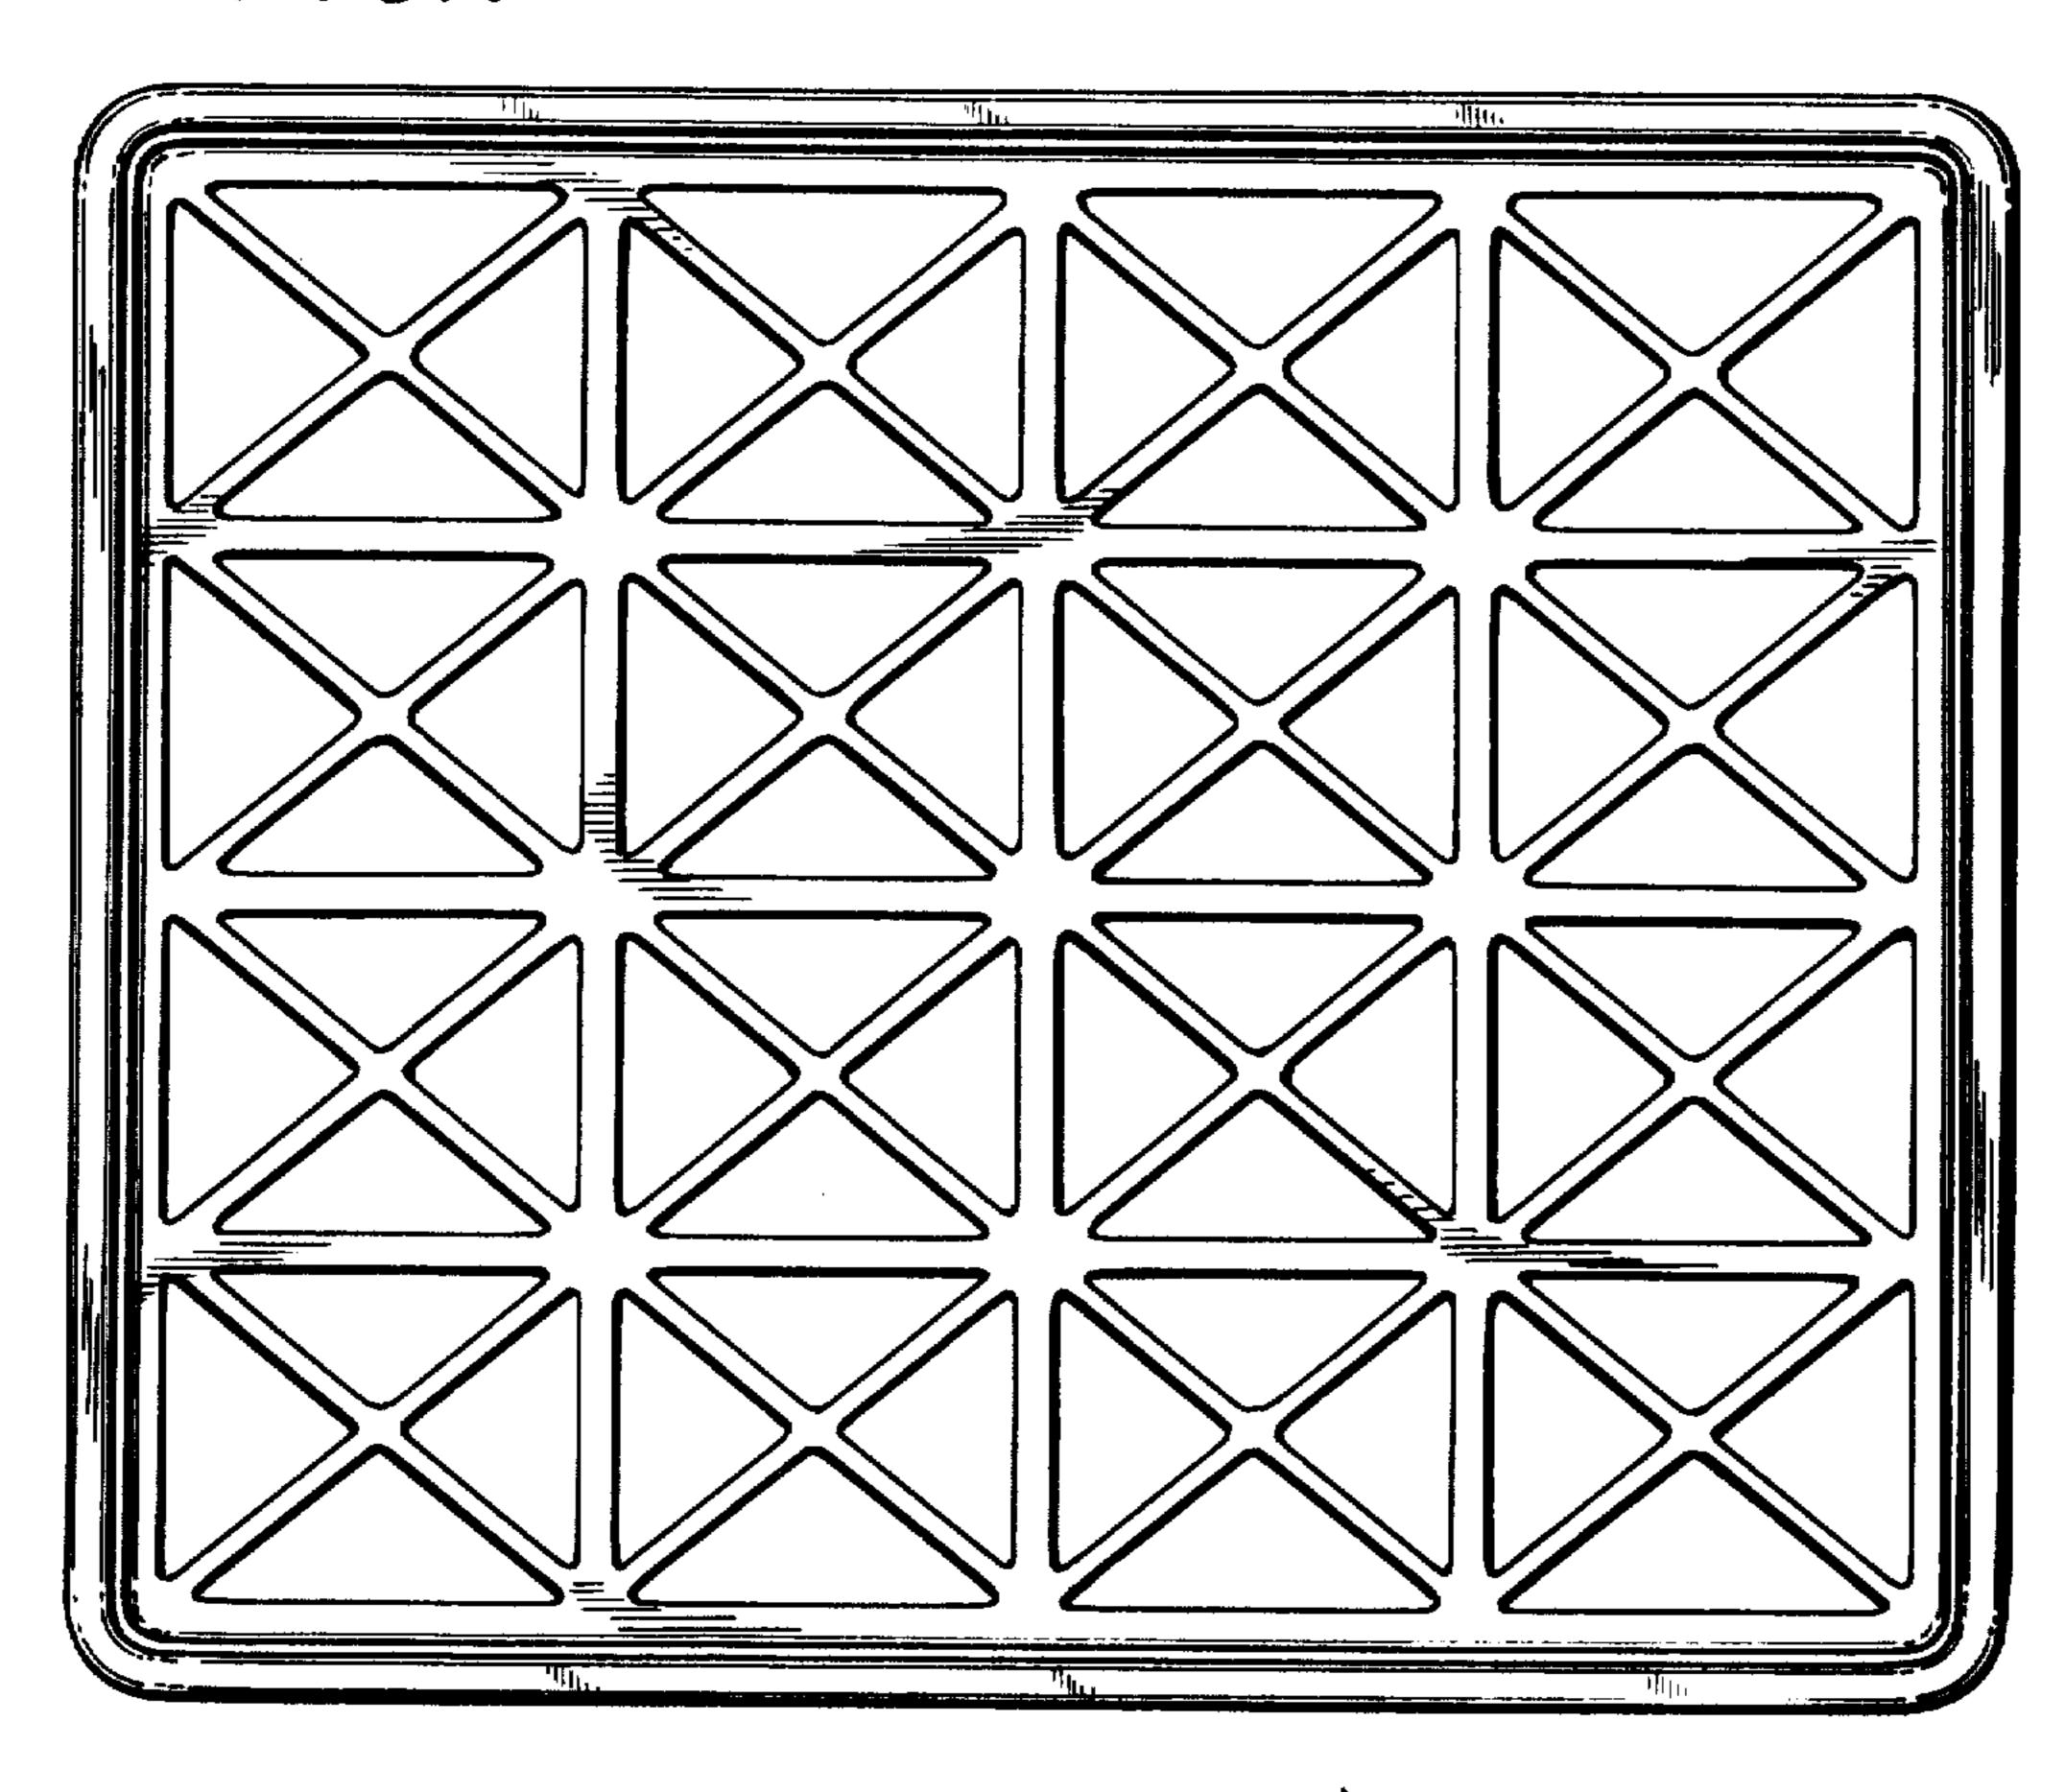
is a bottom plan view of the milk bottle crate shown in FIG. 8.
